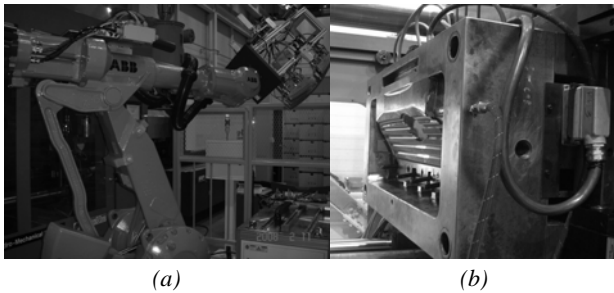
Articulating robot (a) picks up, holds the inserted films in places them in the female mold cavity (b)
